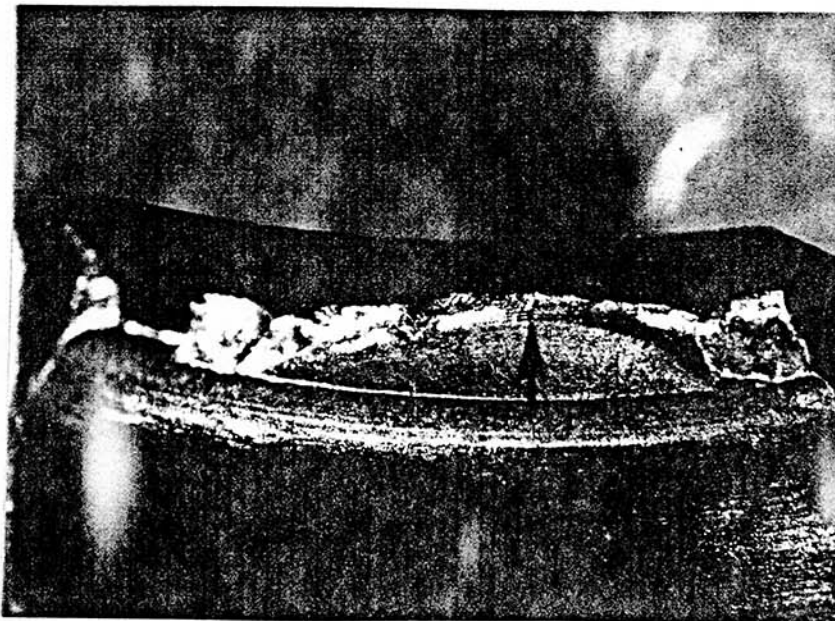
Closeup of fracture surface showing fatigue fracture surface with beach marks on the leading edge (arrow). Magnification: 20.X.
